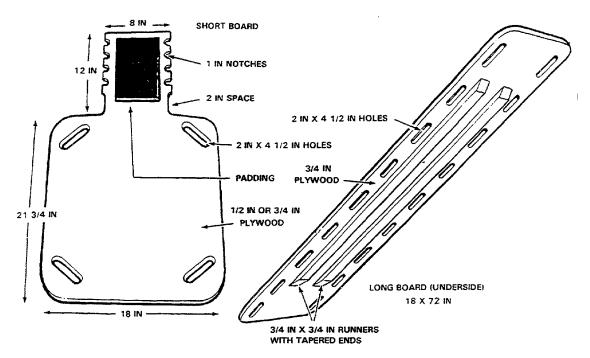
Pre-Fabricated Spine Boards (Short and Long)
